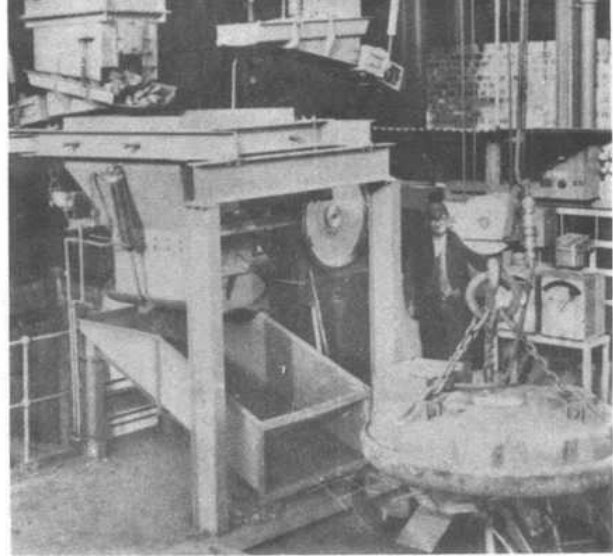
Make-up crane and weigh hopper used with swivel bucket charger.
